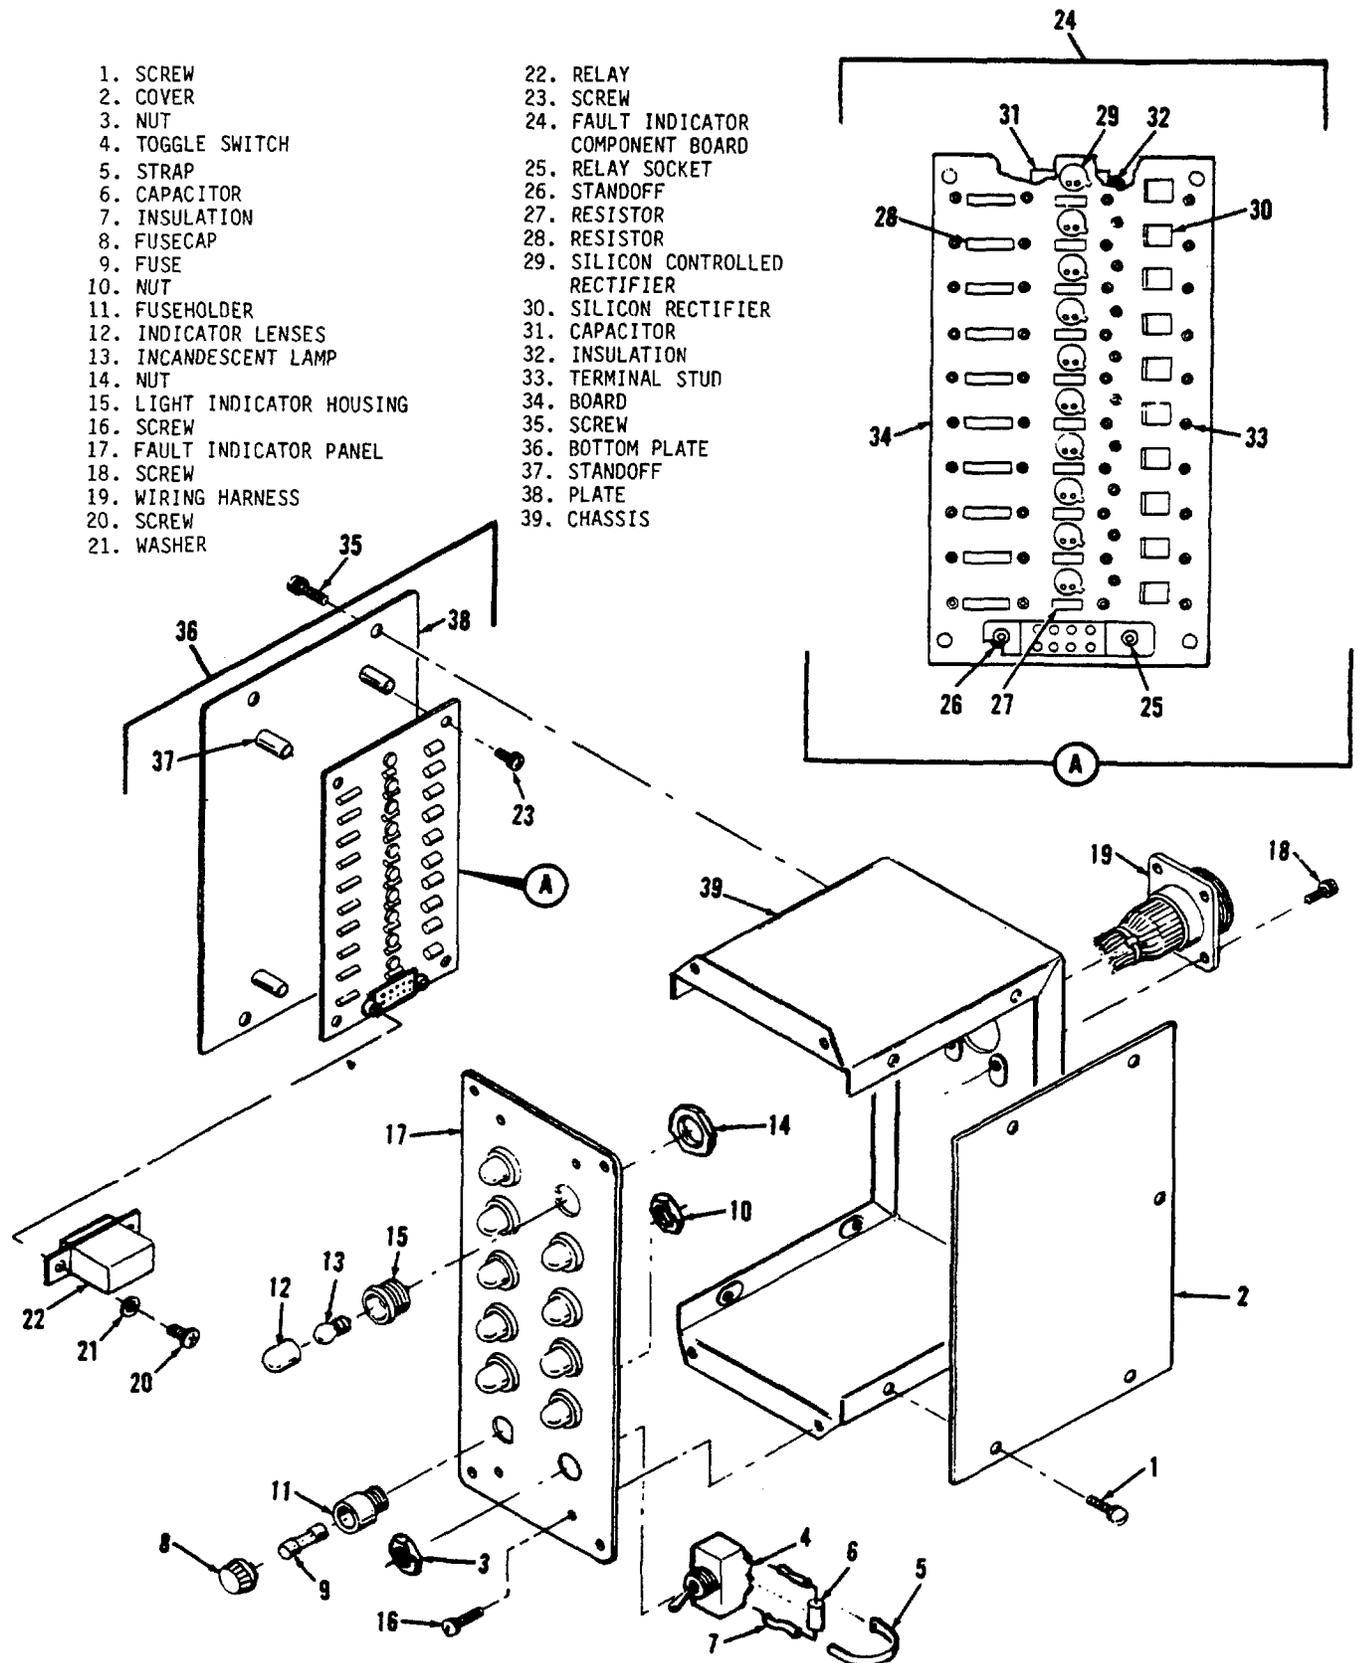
FAULT INDICATOR Assembly A9, Exploded View
